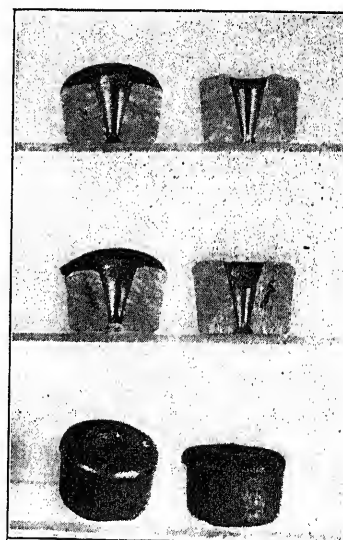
DIES USED FOR DRAWING LINE AND HEAVY-GAGE WIRE
